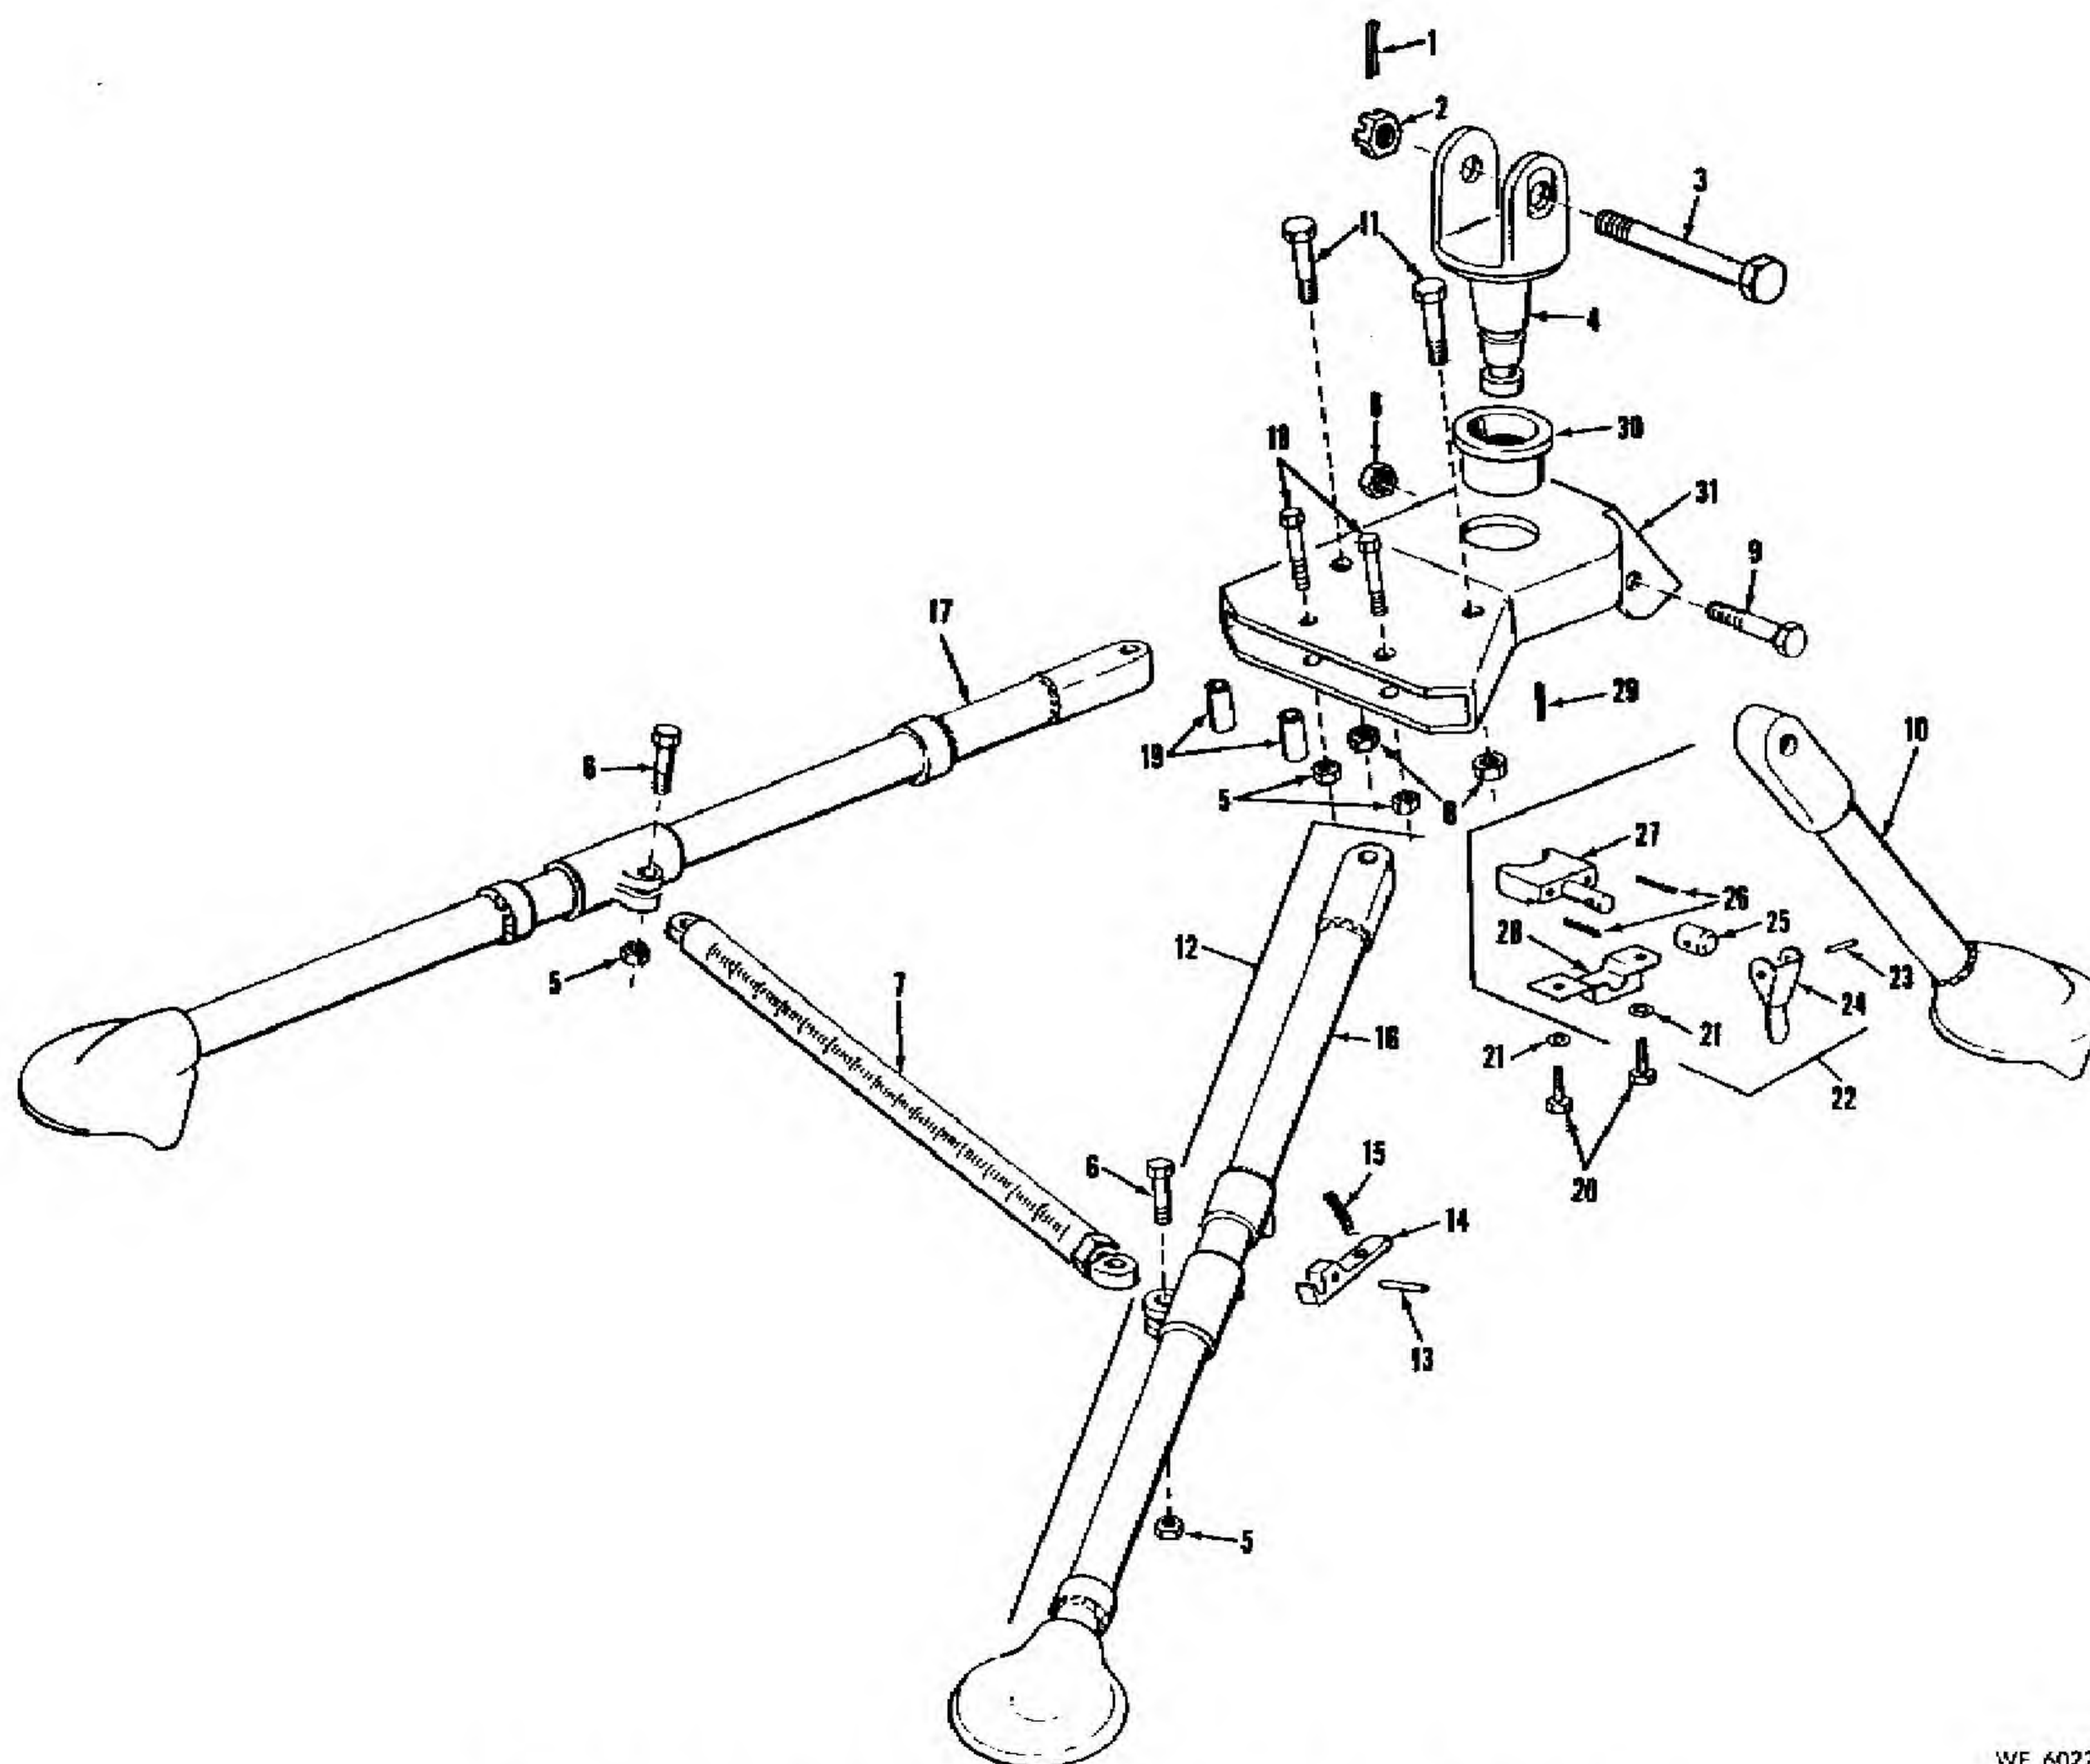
Retracting bar group for Caliber .30 Machine Gun, M37 only—exploded view.
